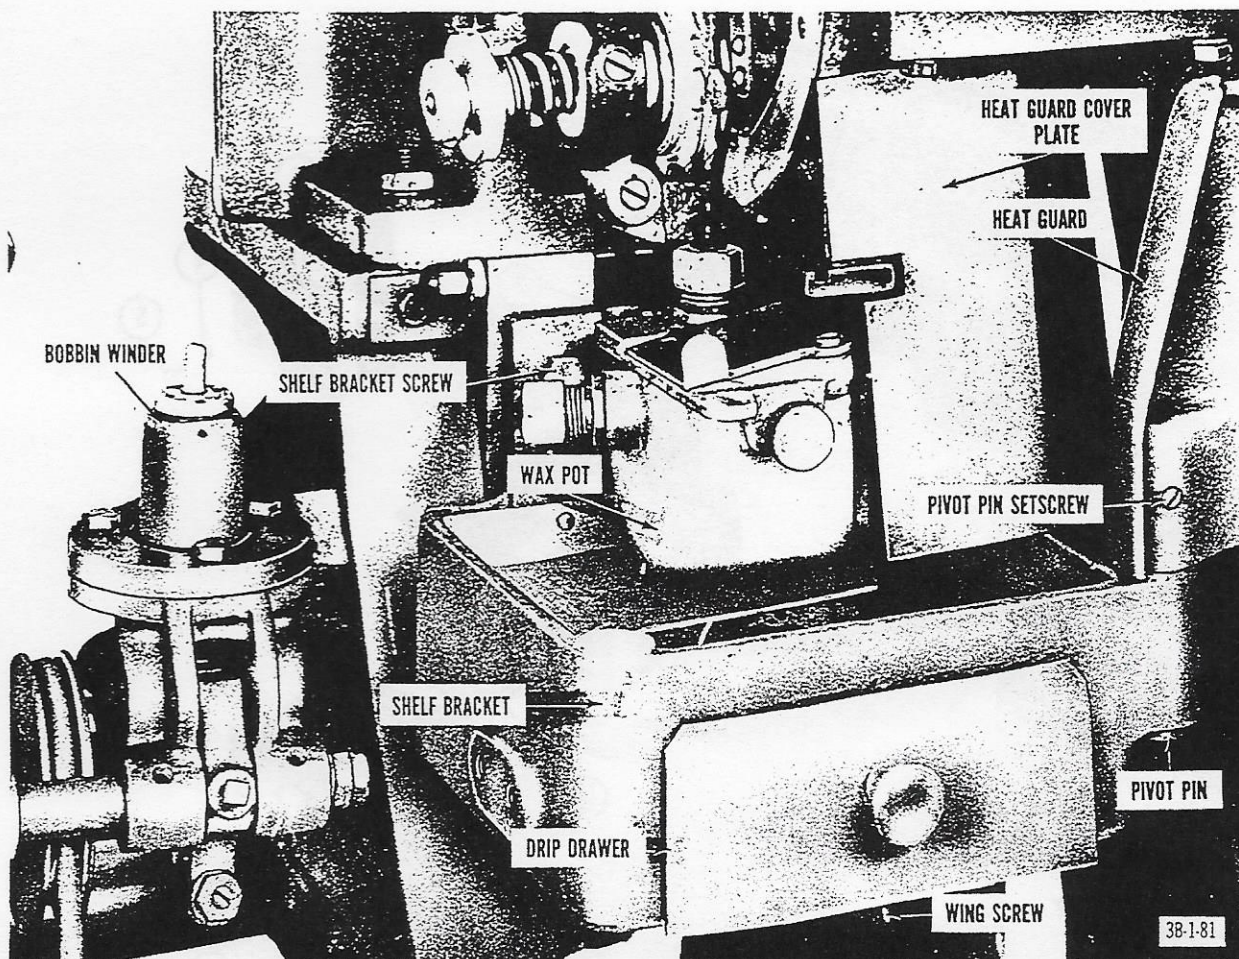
Wax pot assembly installed with shelf bracket and heat guard.
